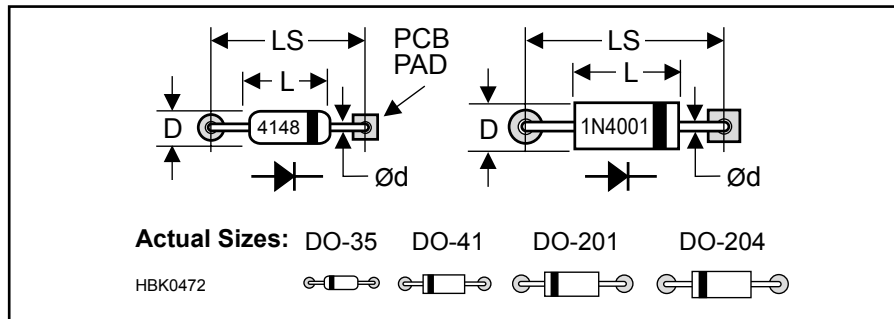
Axial-leaded diode packages and pad dimensions.
